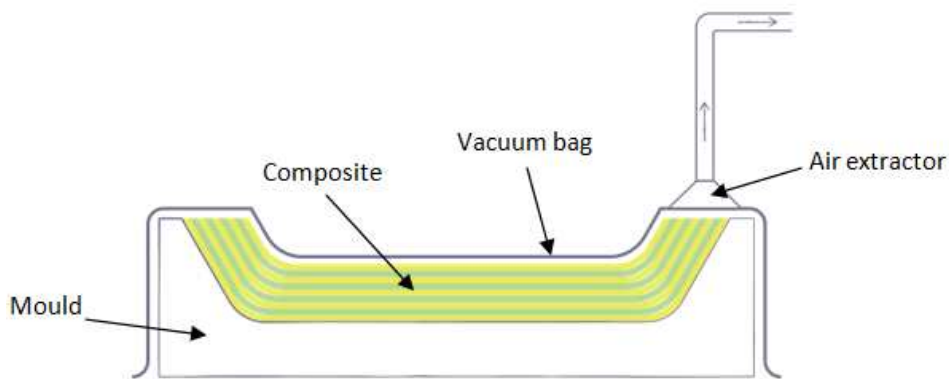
Sketch of composite manufacturing process performed by vacuum bag moulding (adapted from [9])
